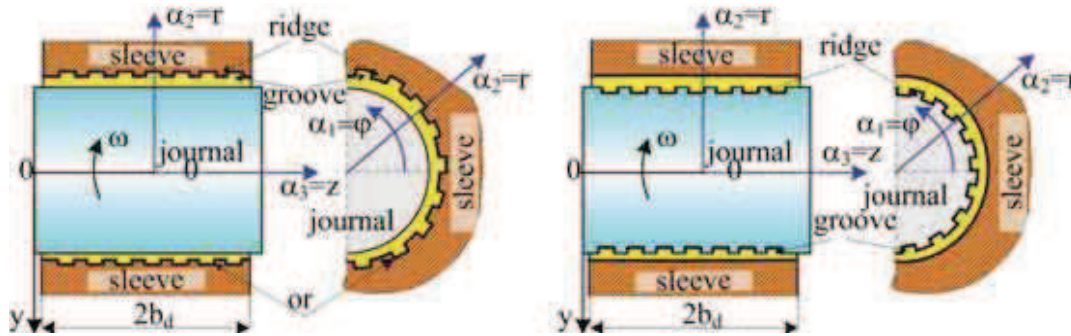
The view of cylindrical microbearing journal surfaces with nano-ridges and grooves
